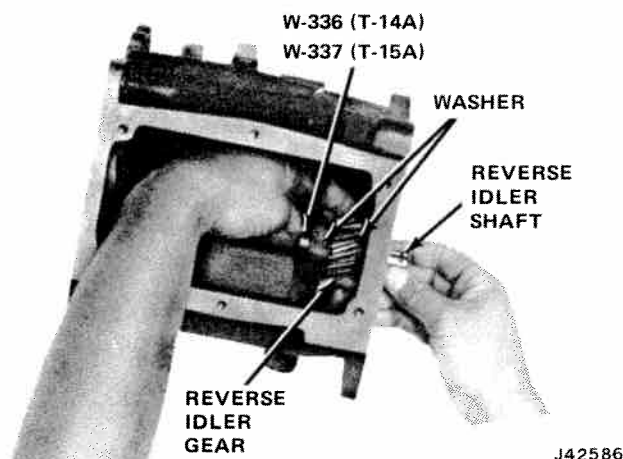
Reverse Gear Idler Gear Removal and Installation
